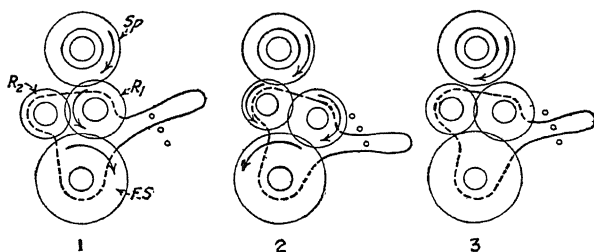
Illustrates operation of reverse gears or tumbler gears.
